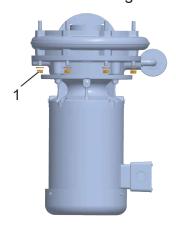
Tightening the nuts for fastening the pump casing (example: herborner.F-N)
